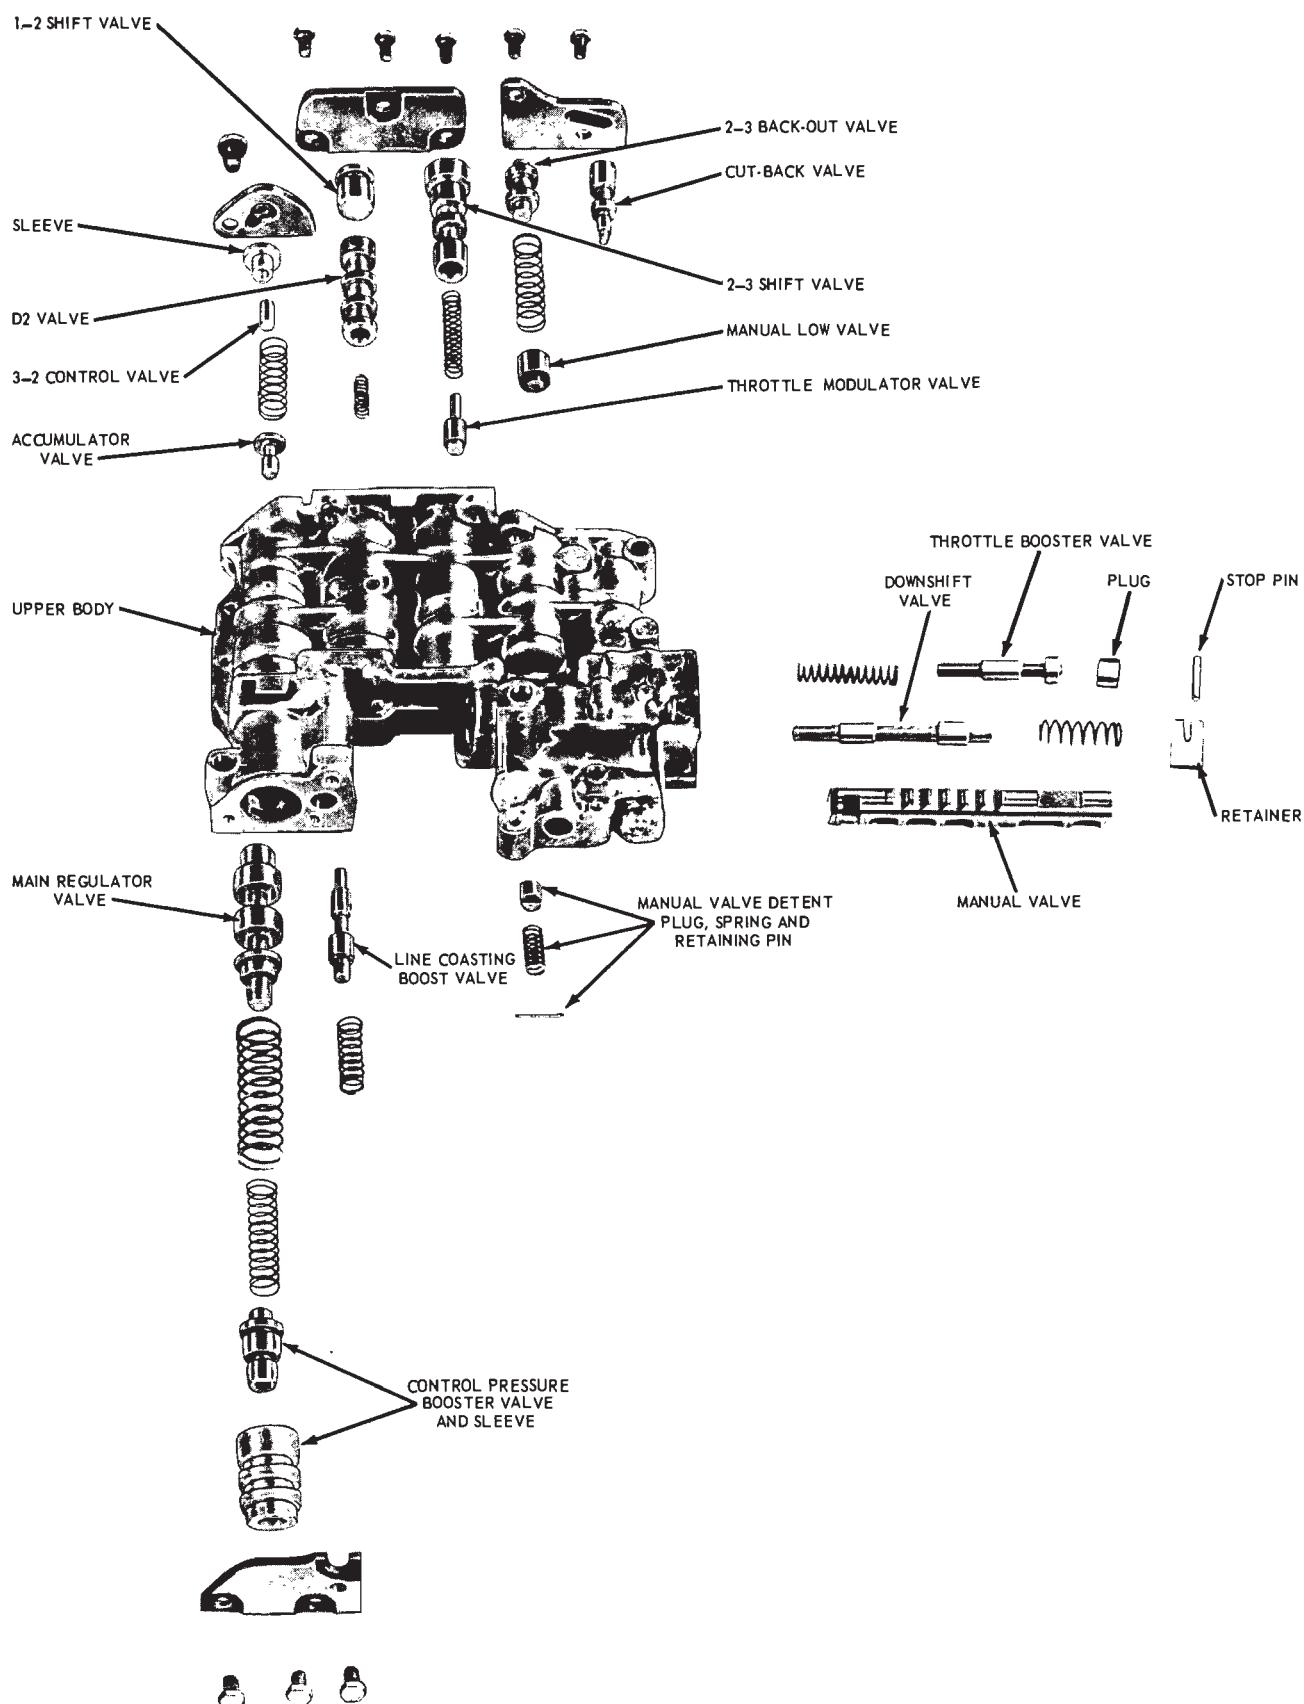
Upper Valve Body Disassembled—C4 Automatic—Falcon
